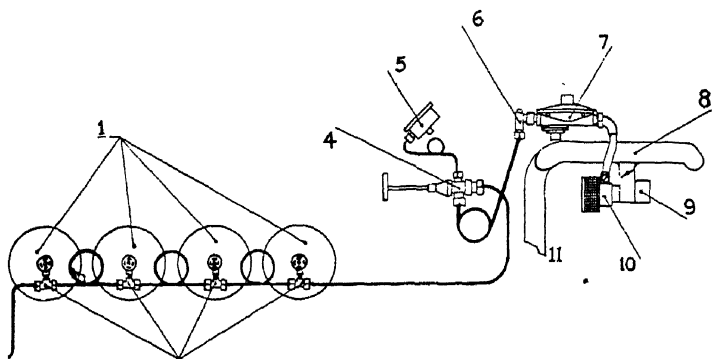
High Pressure Gas Installation for Motor Vehicle Engine.
